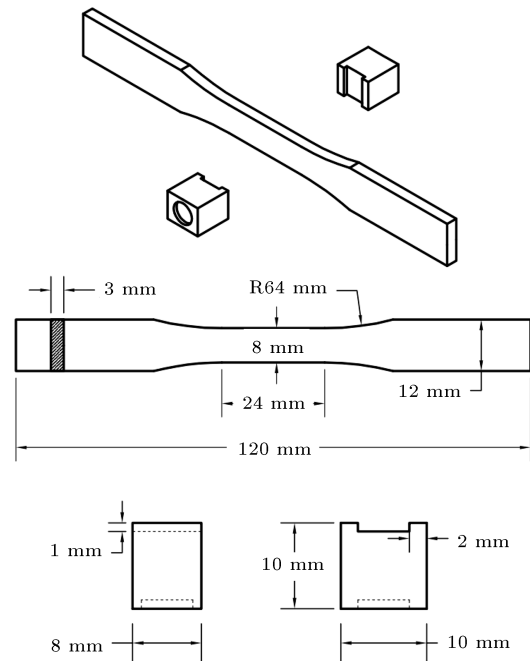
The geometries of pads and specimens used in fretting fatigue tests.
